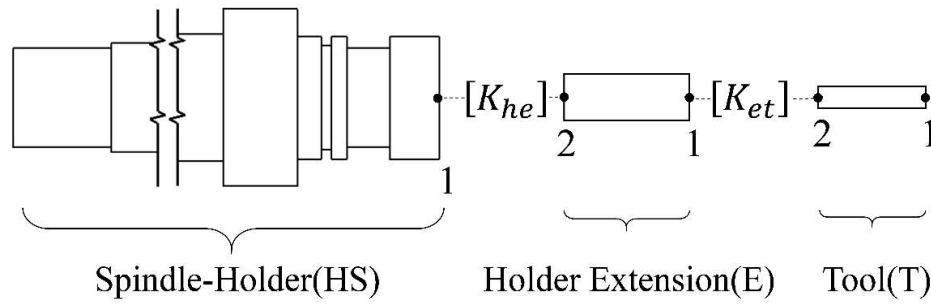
Spindle-holder-holder extension-tool (TEHS) assembly
